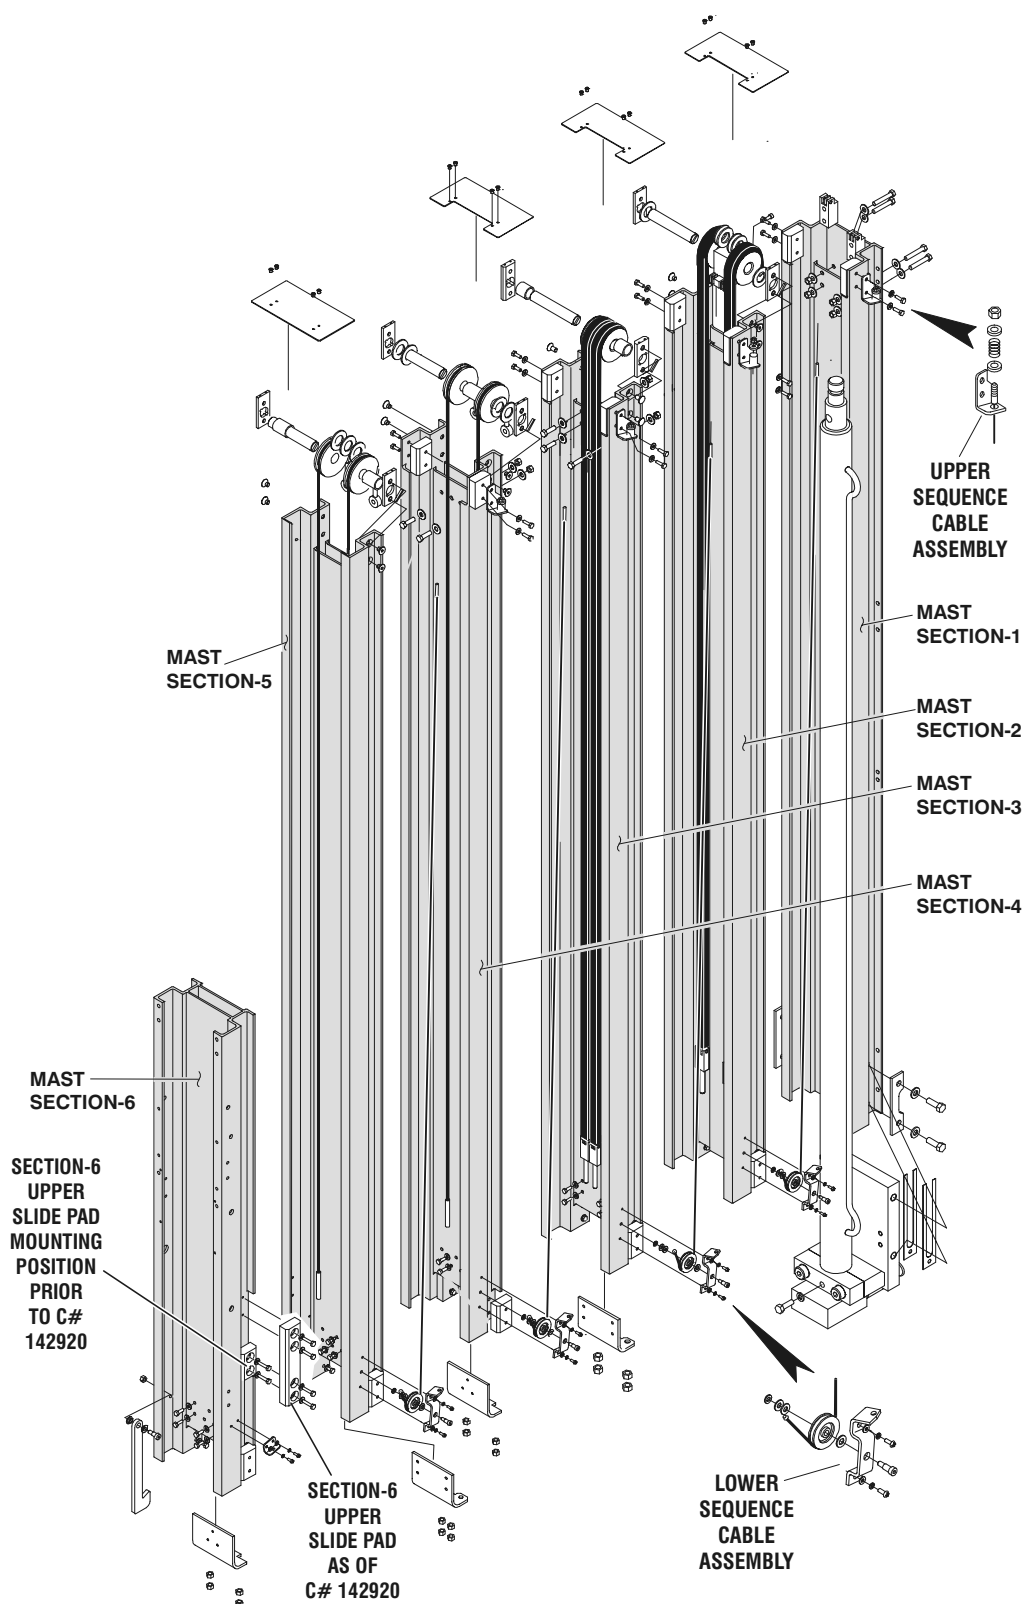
25EL & 36EL Mast Assembly Components. (6 - Section)
